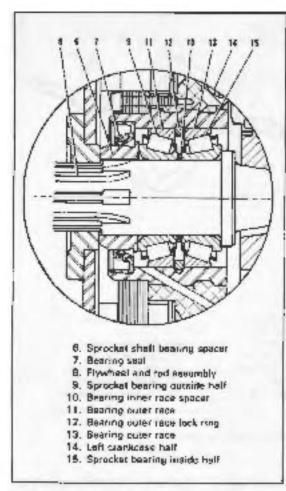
Sprocket Shaft Bearing Assembly -Section View
